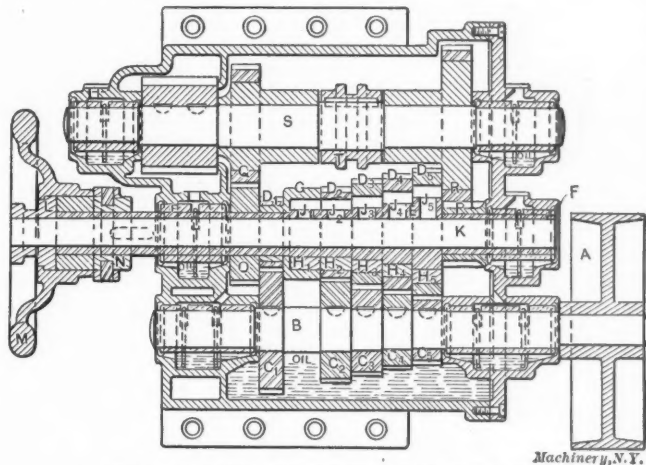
Gear Box with Constant Speed Pulley Drive.
